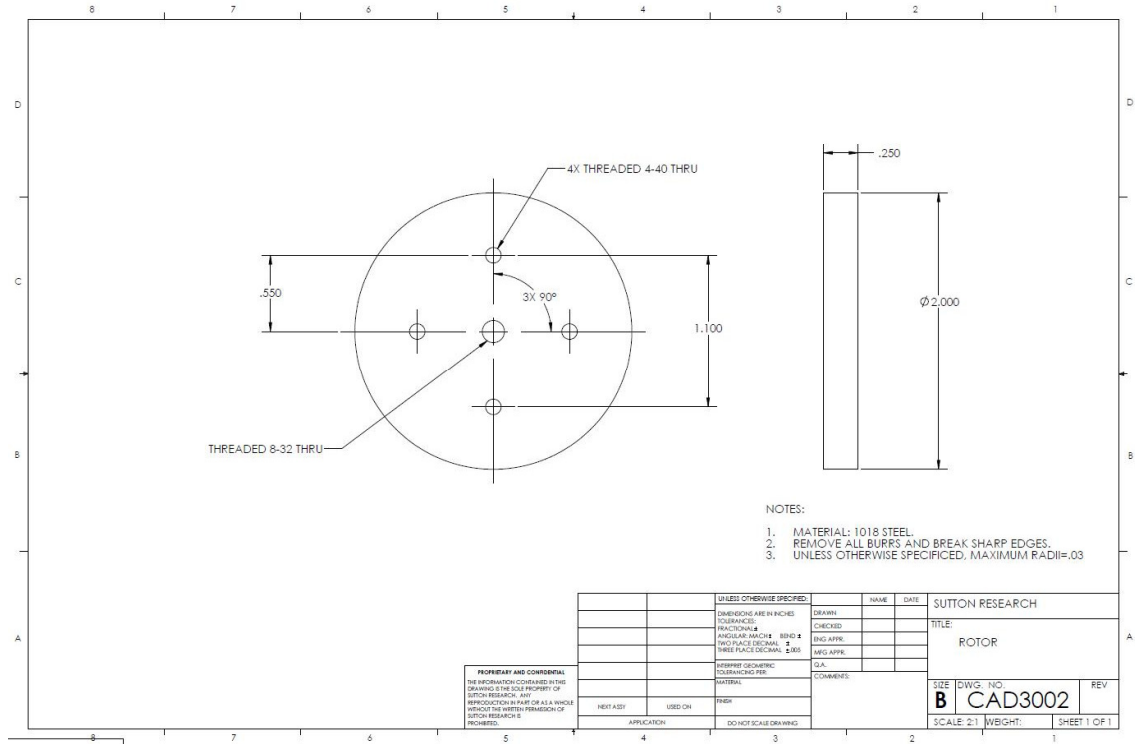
Rotor Drawing. This figure details the rotor for the permanent magnet machine built and tested for experiments 3 and 4.
